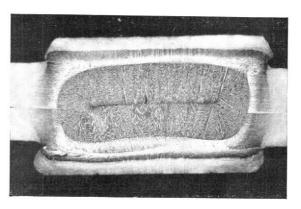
Example of a hot-formed rivet showing the type of defects to avoid; enlarged.
